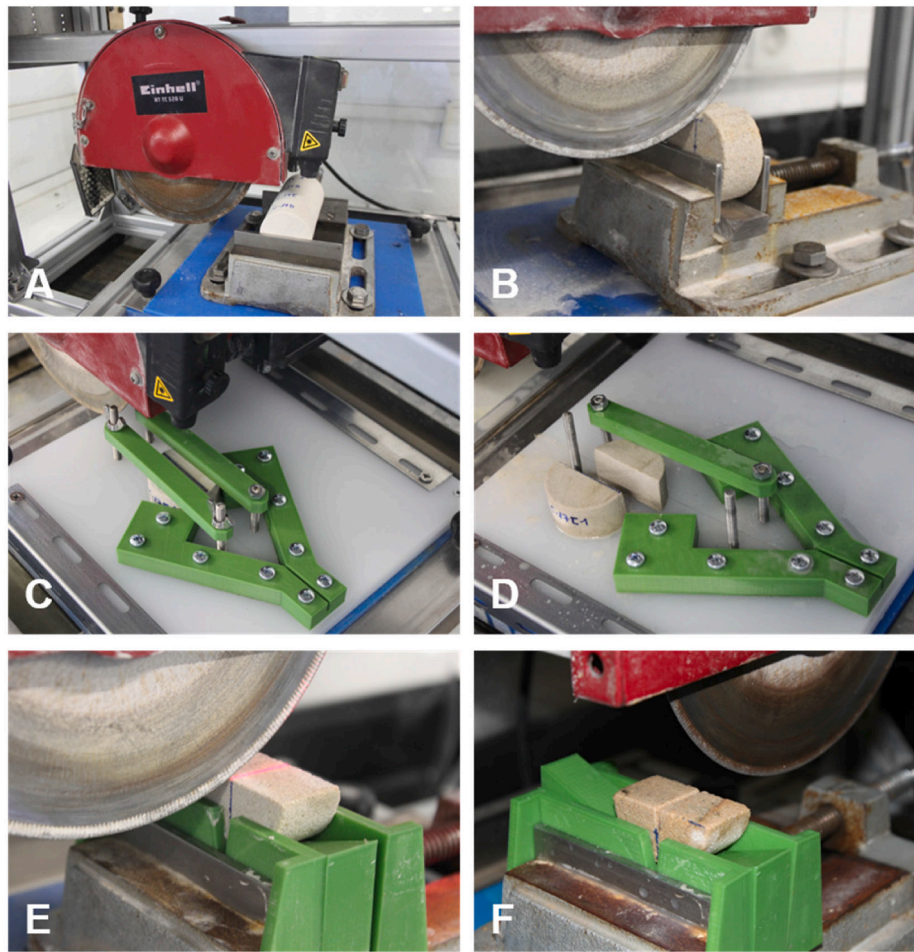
Preparation of samples for SCB and *p*CT testing. A) Plug slicing; B) U-shaped groove carving; C and D) Halving SCB specimens; E) Laser alignment for straight thin-notch cutting; F) SCB sample finished after a single pass of the diamond saw.
